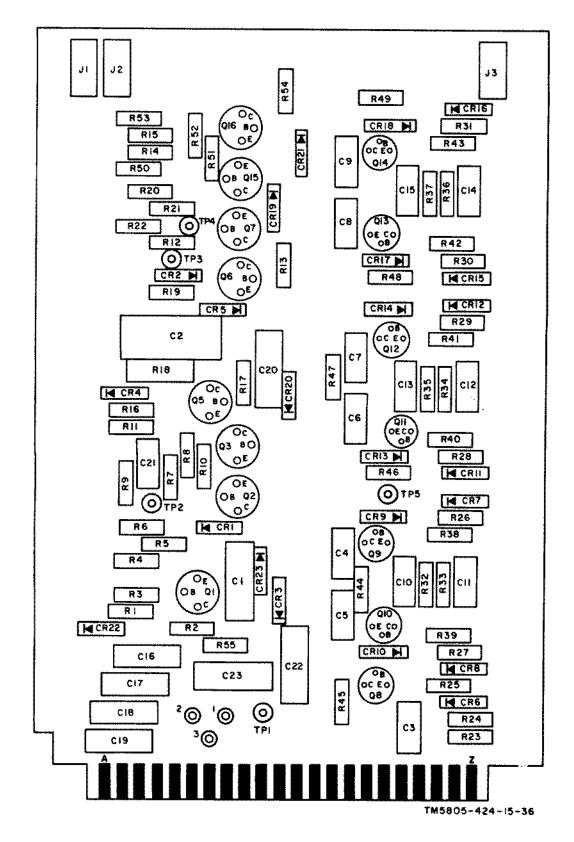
Printed-circuit card assembly A3 (PC 80034140), component location diagram.
